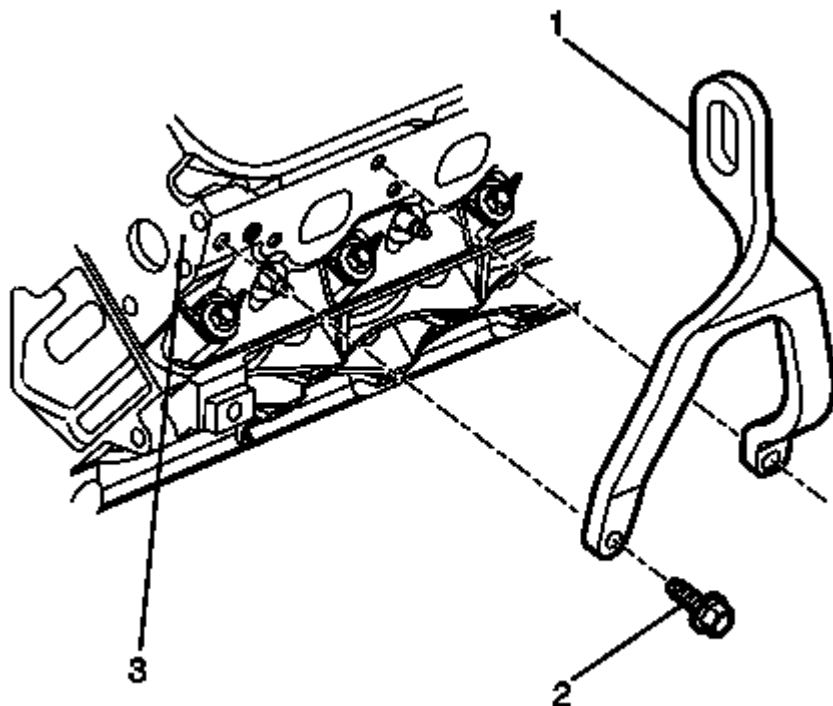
View Of EN 46114, Cylinder Head & Retaining Bolts
